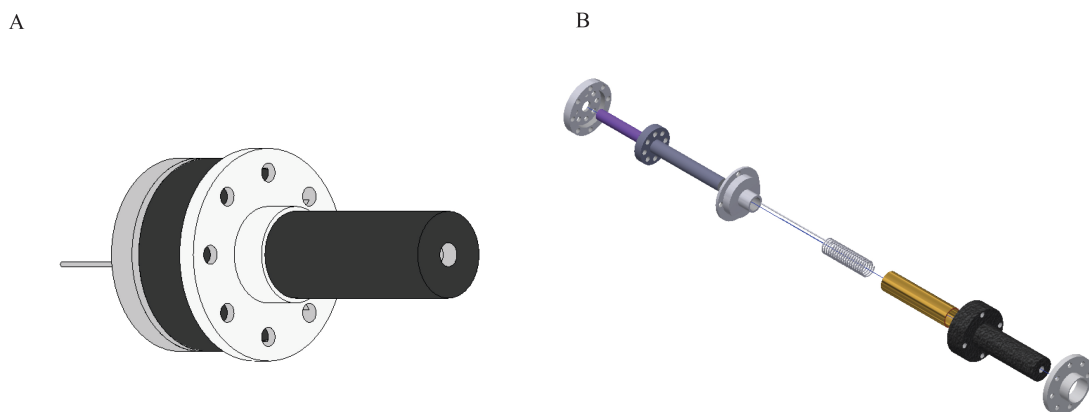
A) The hollow cathode design B) Exploded view from the hollow cathode
